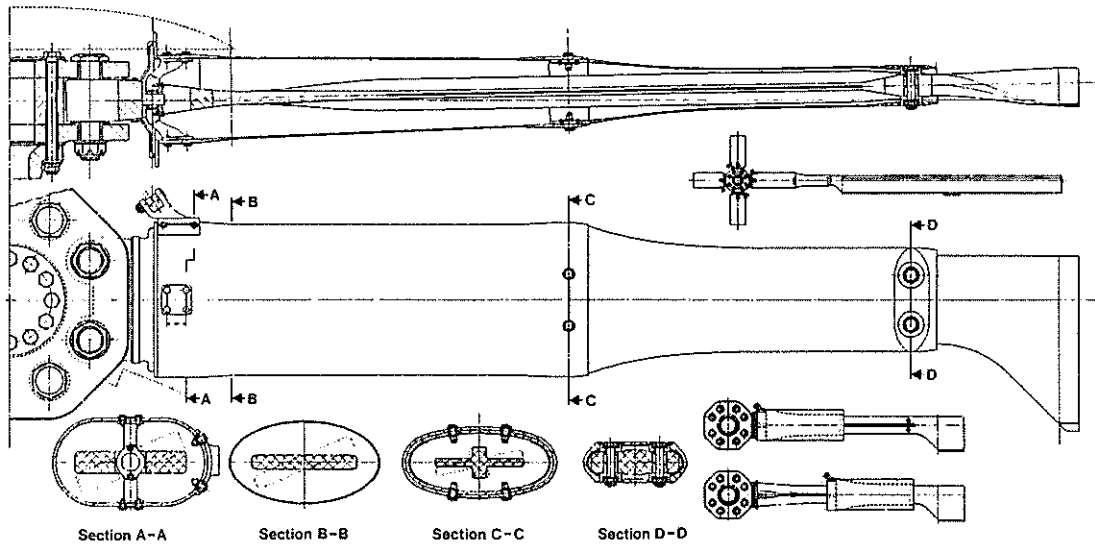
Composite Bearingless Main Rotor Design With Flexural Single Beam Element and Control Tube
